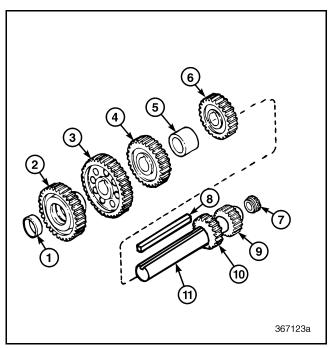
Front Countershaft Component Locator (T313L/T318L Shown)
